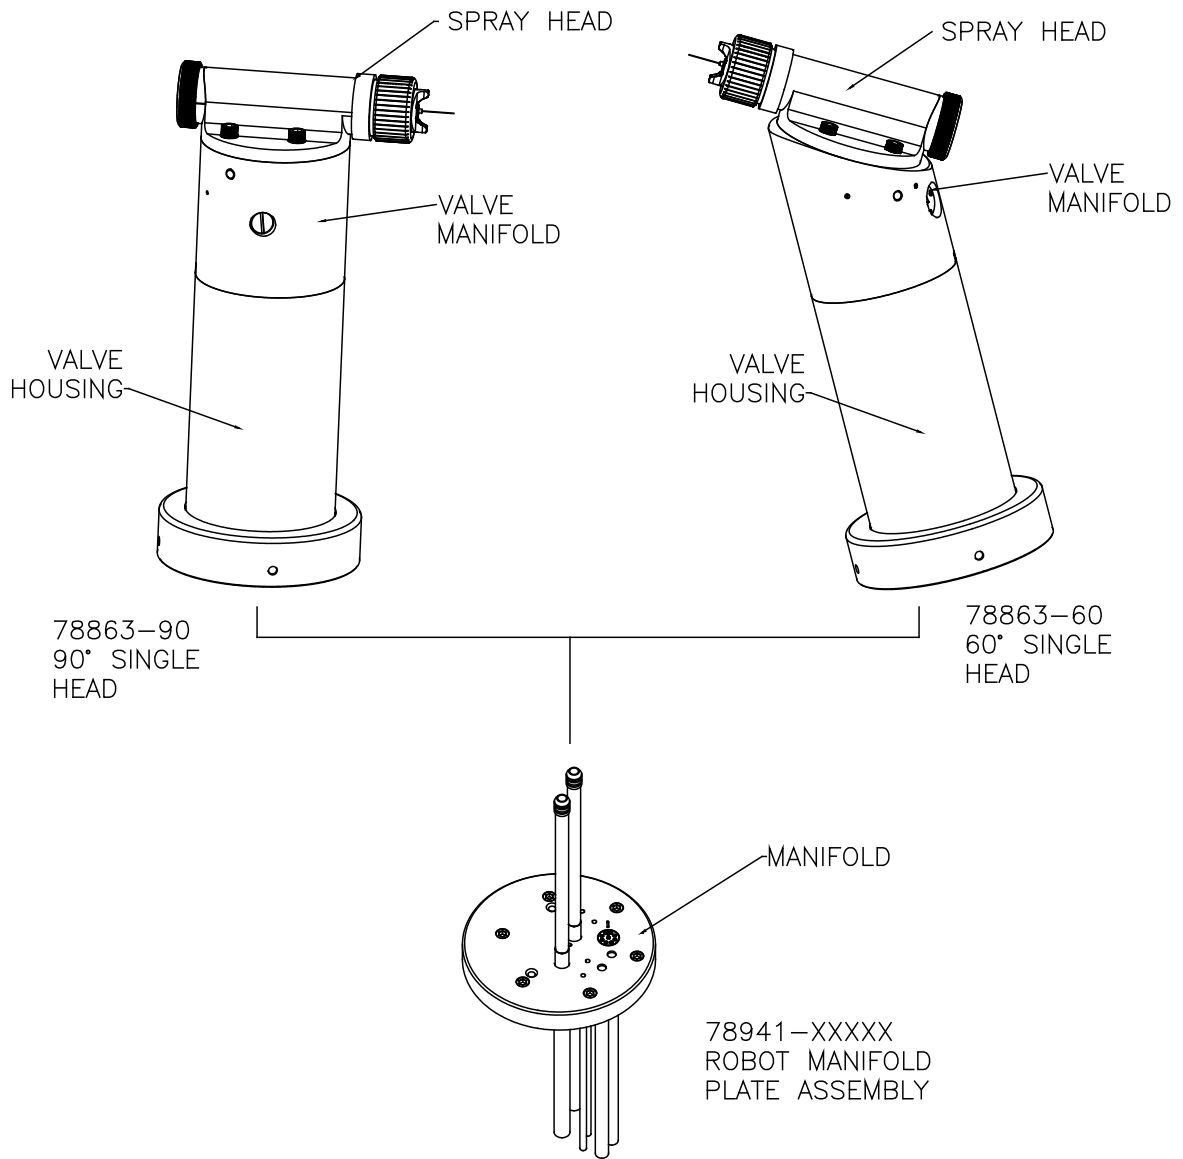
RWA-EFM Series Spray Guns and 78941-XXXXX Robot Manifold Assembly
